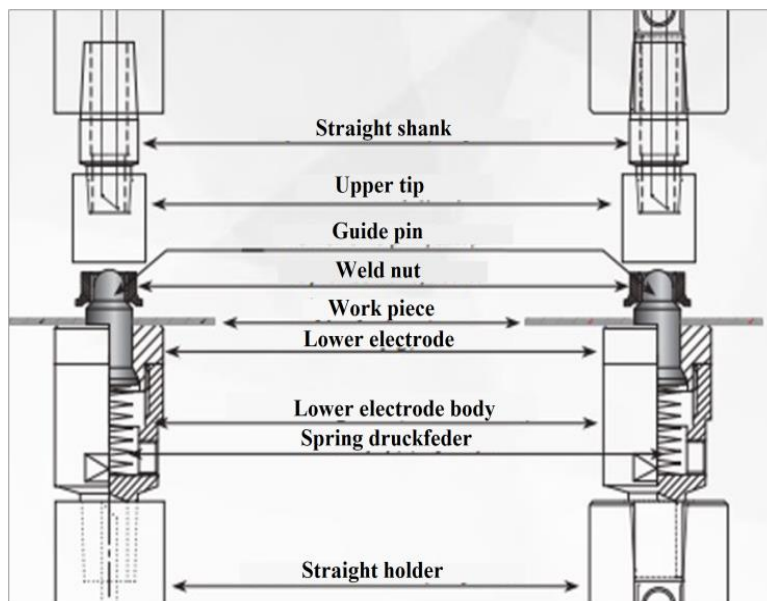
Weld nut projection welding process apparatus [19]
